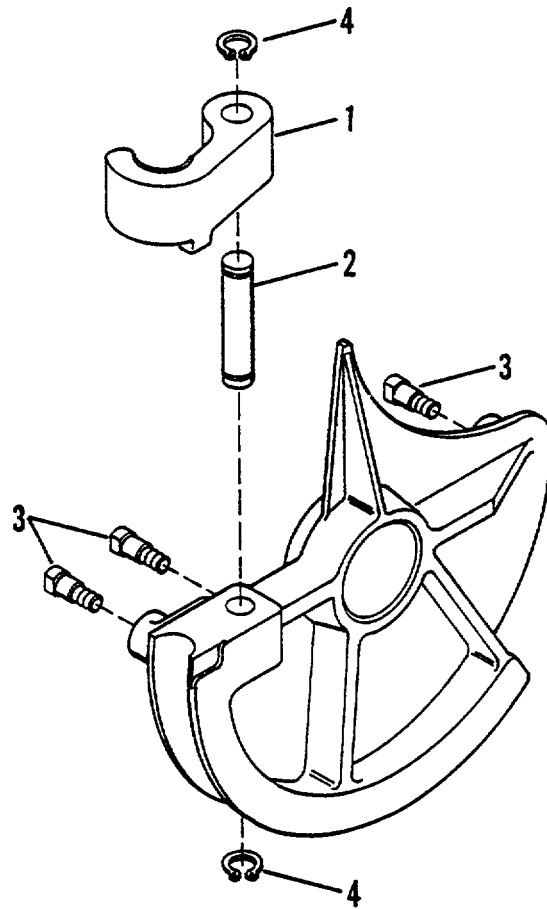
Bending Shoe 1-1/2" EMT Conduit
